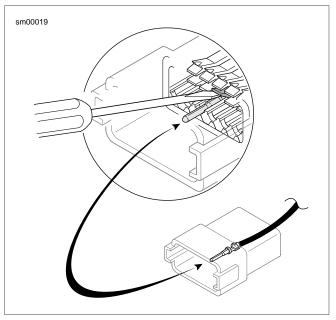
Deutsch DT Sealed Connector: Press Terminal Latch and Back Out Pin
